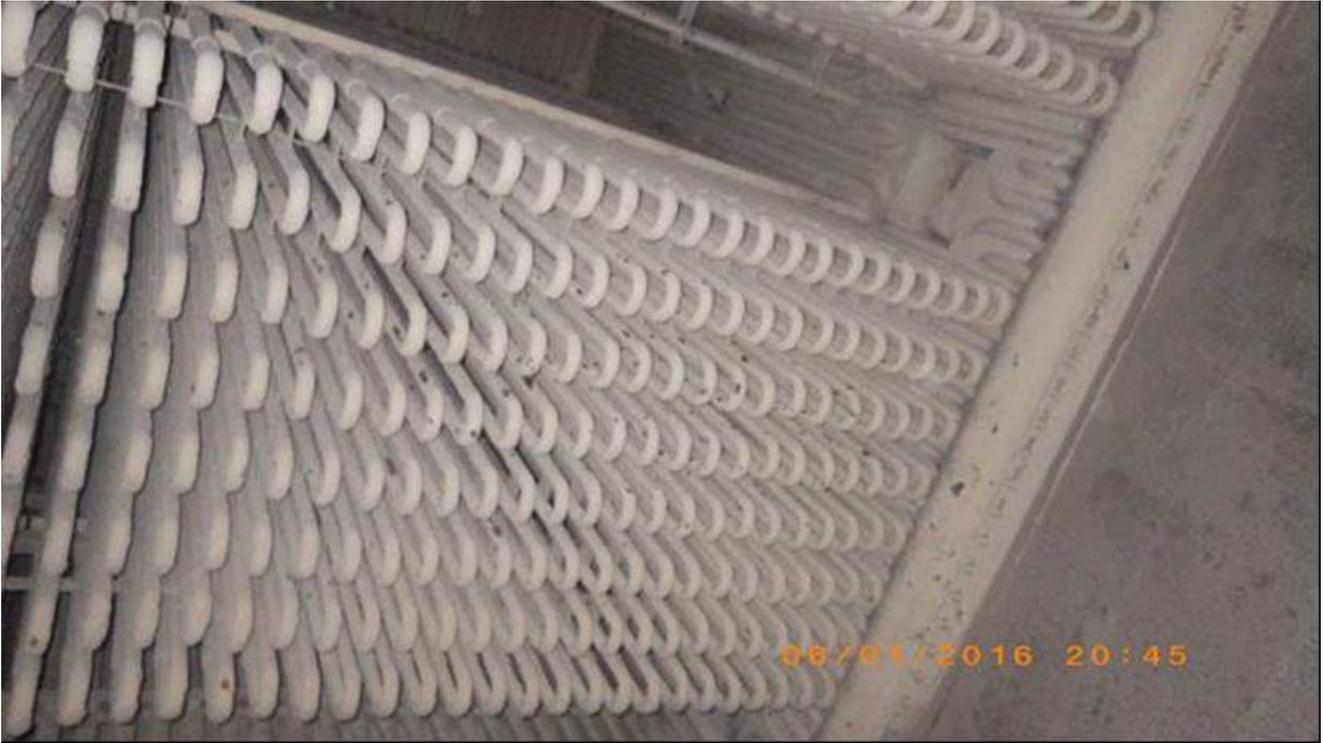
View Up From Hopper Looking at Superheater Bottom Loops – Fouling Normal to Low
